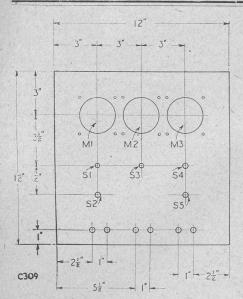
Sketch showing panel drilling dimensions. The layout is a suggestion, arising from the original model.
